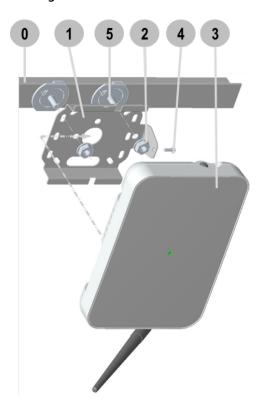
Figure 7 - Mounting an AP-2010 on a T-Mounting Rail
